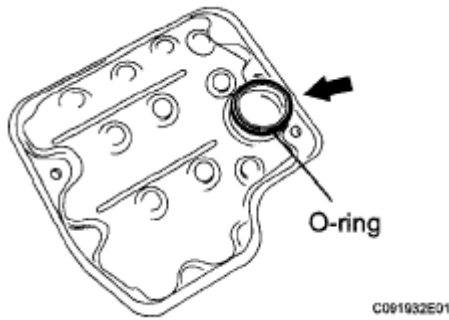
Locating Valve Body Oil Strainer O-Ring
